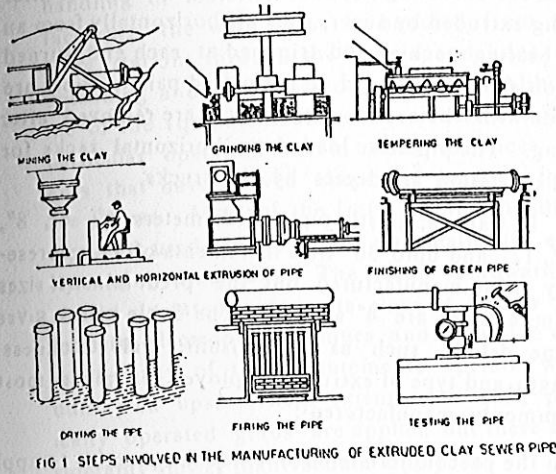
STEPS INVOLVED IN THE MANUFACTURING OF EXTRUDED CLAY SEWER PIPE
